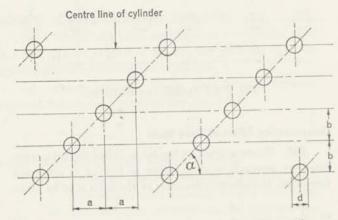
Spacing of Holes on a Diagonal Line
